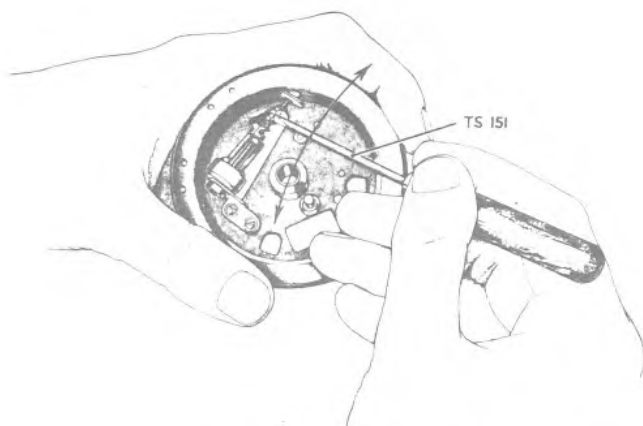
CHECKING ADJUSTMENT OF GOVERNOR
